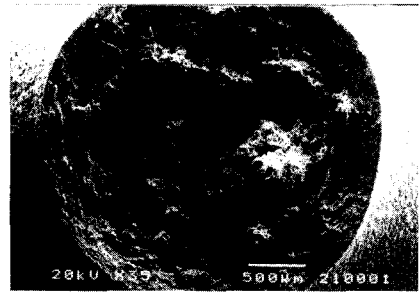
Fracture surface at 700℃ (575452cycles)
